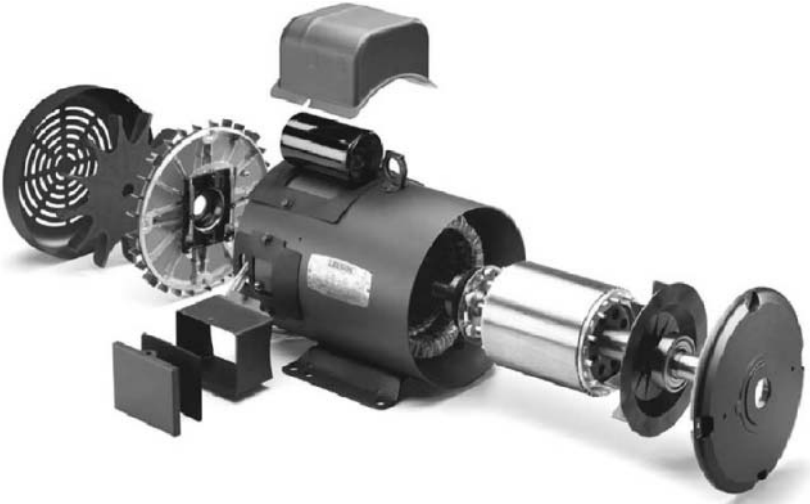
Exploded view of a typical squirrel-cage induction motor (Courtesy of Leeson Electric Corp.)
